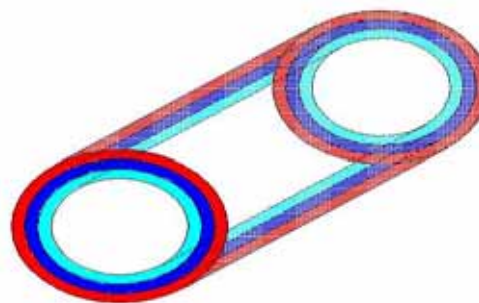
Winding layers of „thin wall” test tubes and „thick wall” test tubes
